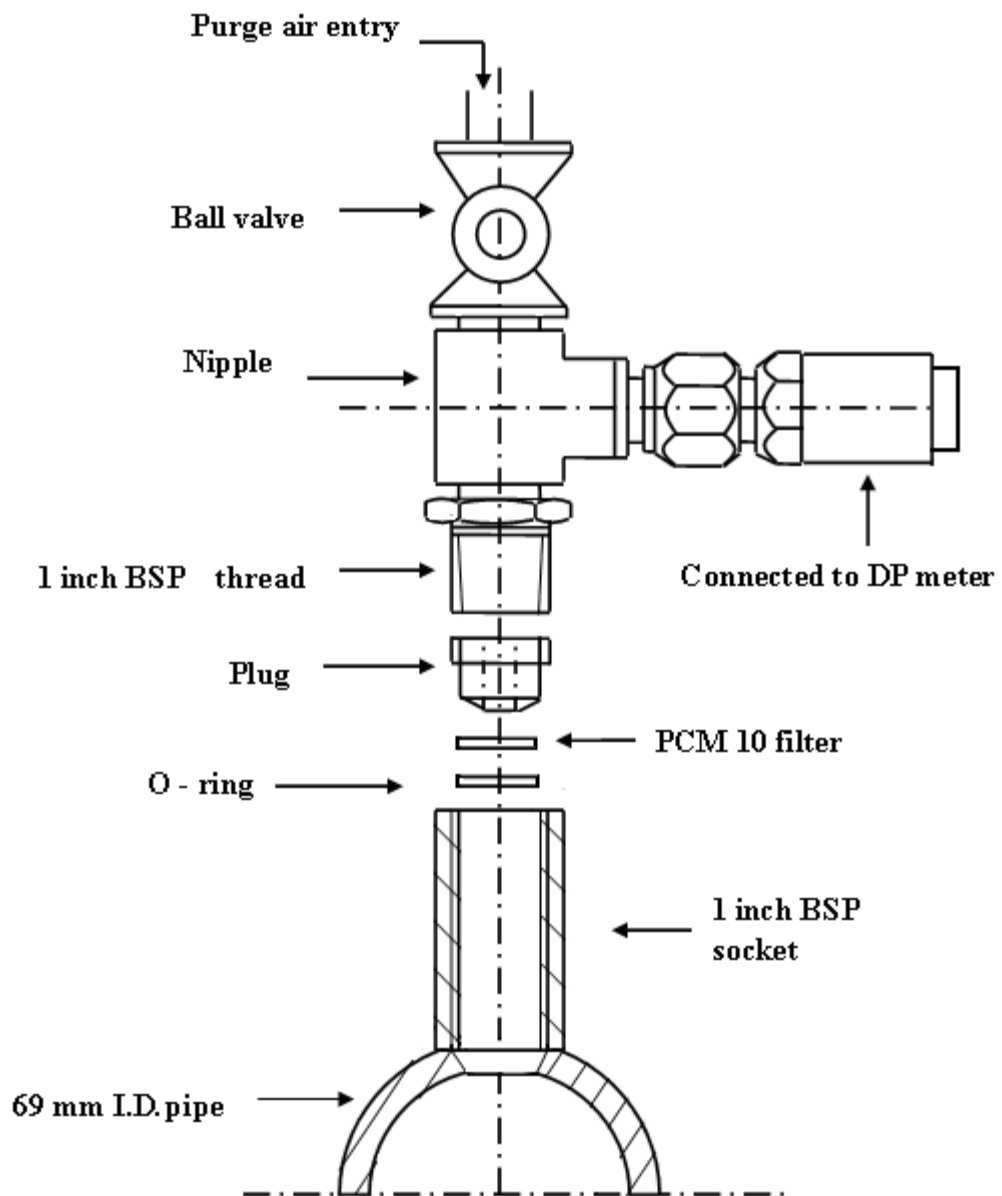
Exploded View of a Typical DP Pressure Tapping
